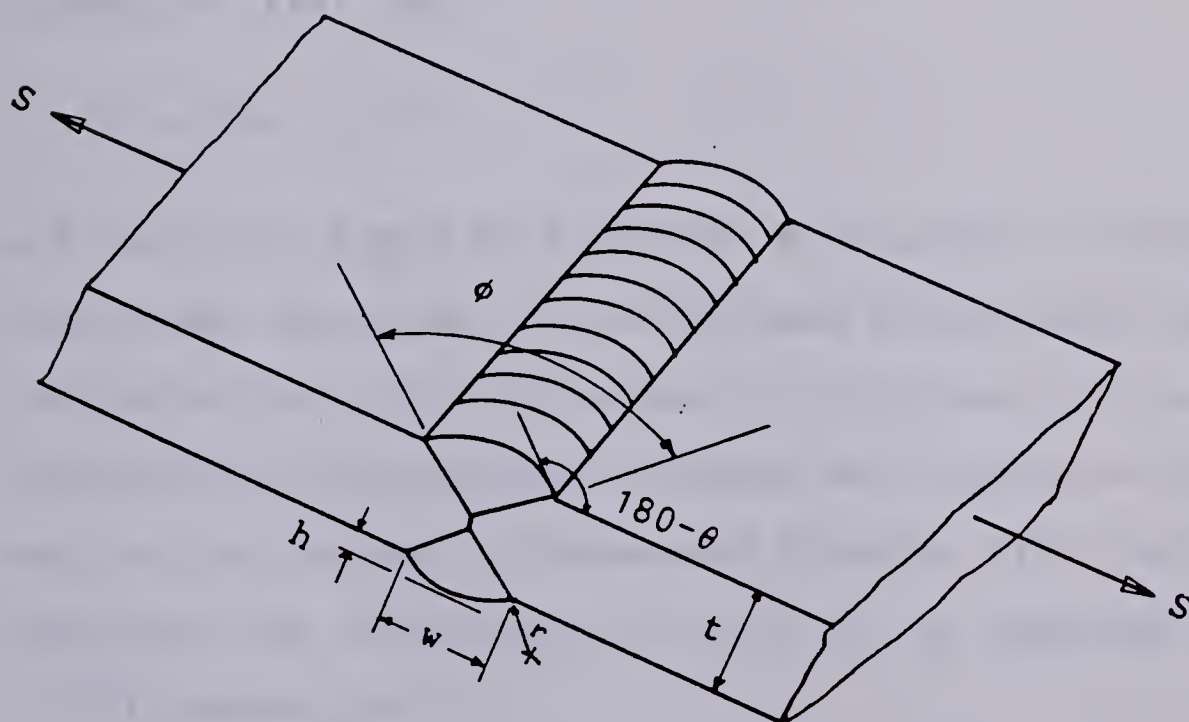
Geometrical parameters for transverse butt-weld.
